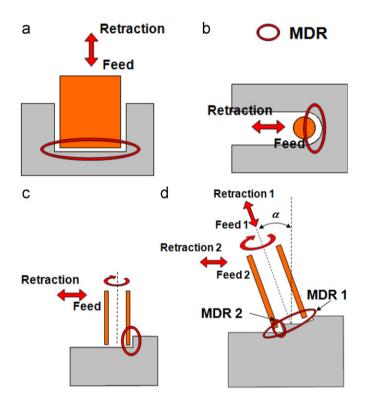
Gap control and MDR in EDM: (a) sinking EDM, (b) wire EDM, (c) three-axis EDM milling, and (d) five-axis near-dry EDM milling.
